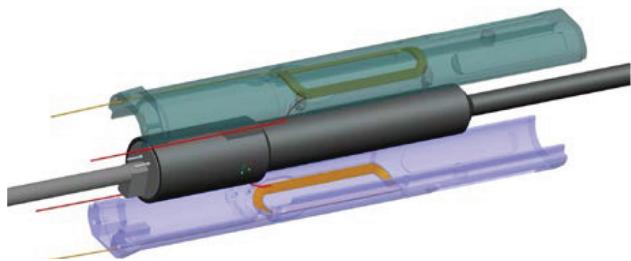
Gradient coils encapsulate the metallic sample holder.
